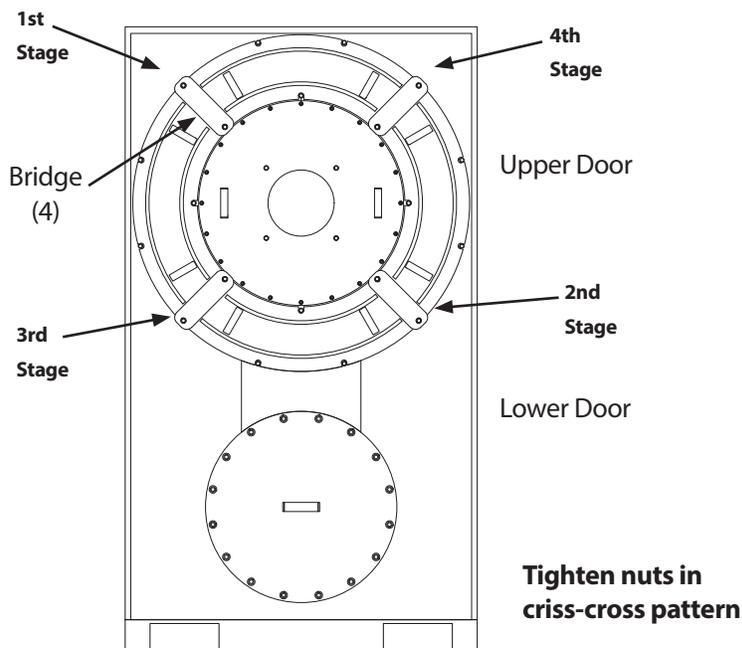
B - VERIFYING TORQUE SETTINGS (FRONT VIEW, PANELS REMOVED)
